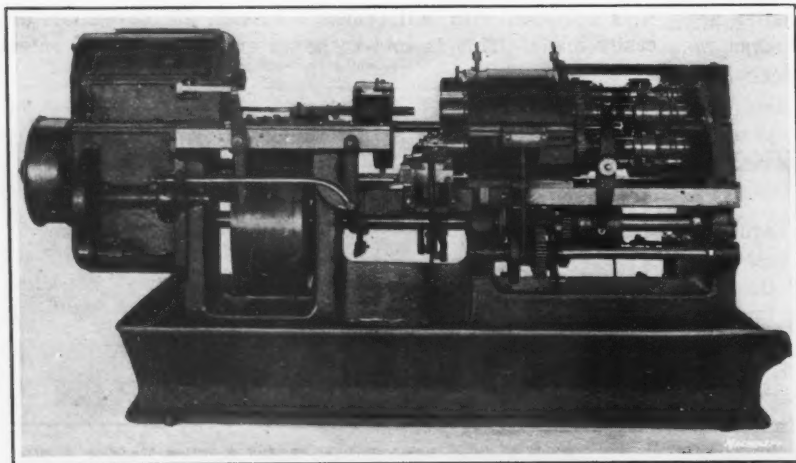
Opposite Side of New Britain Automatic Chucking Machine shown in Fig. 1
